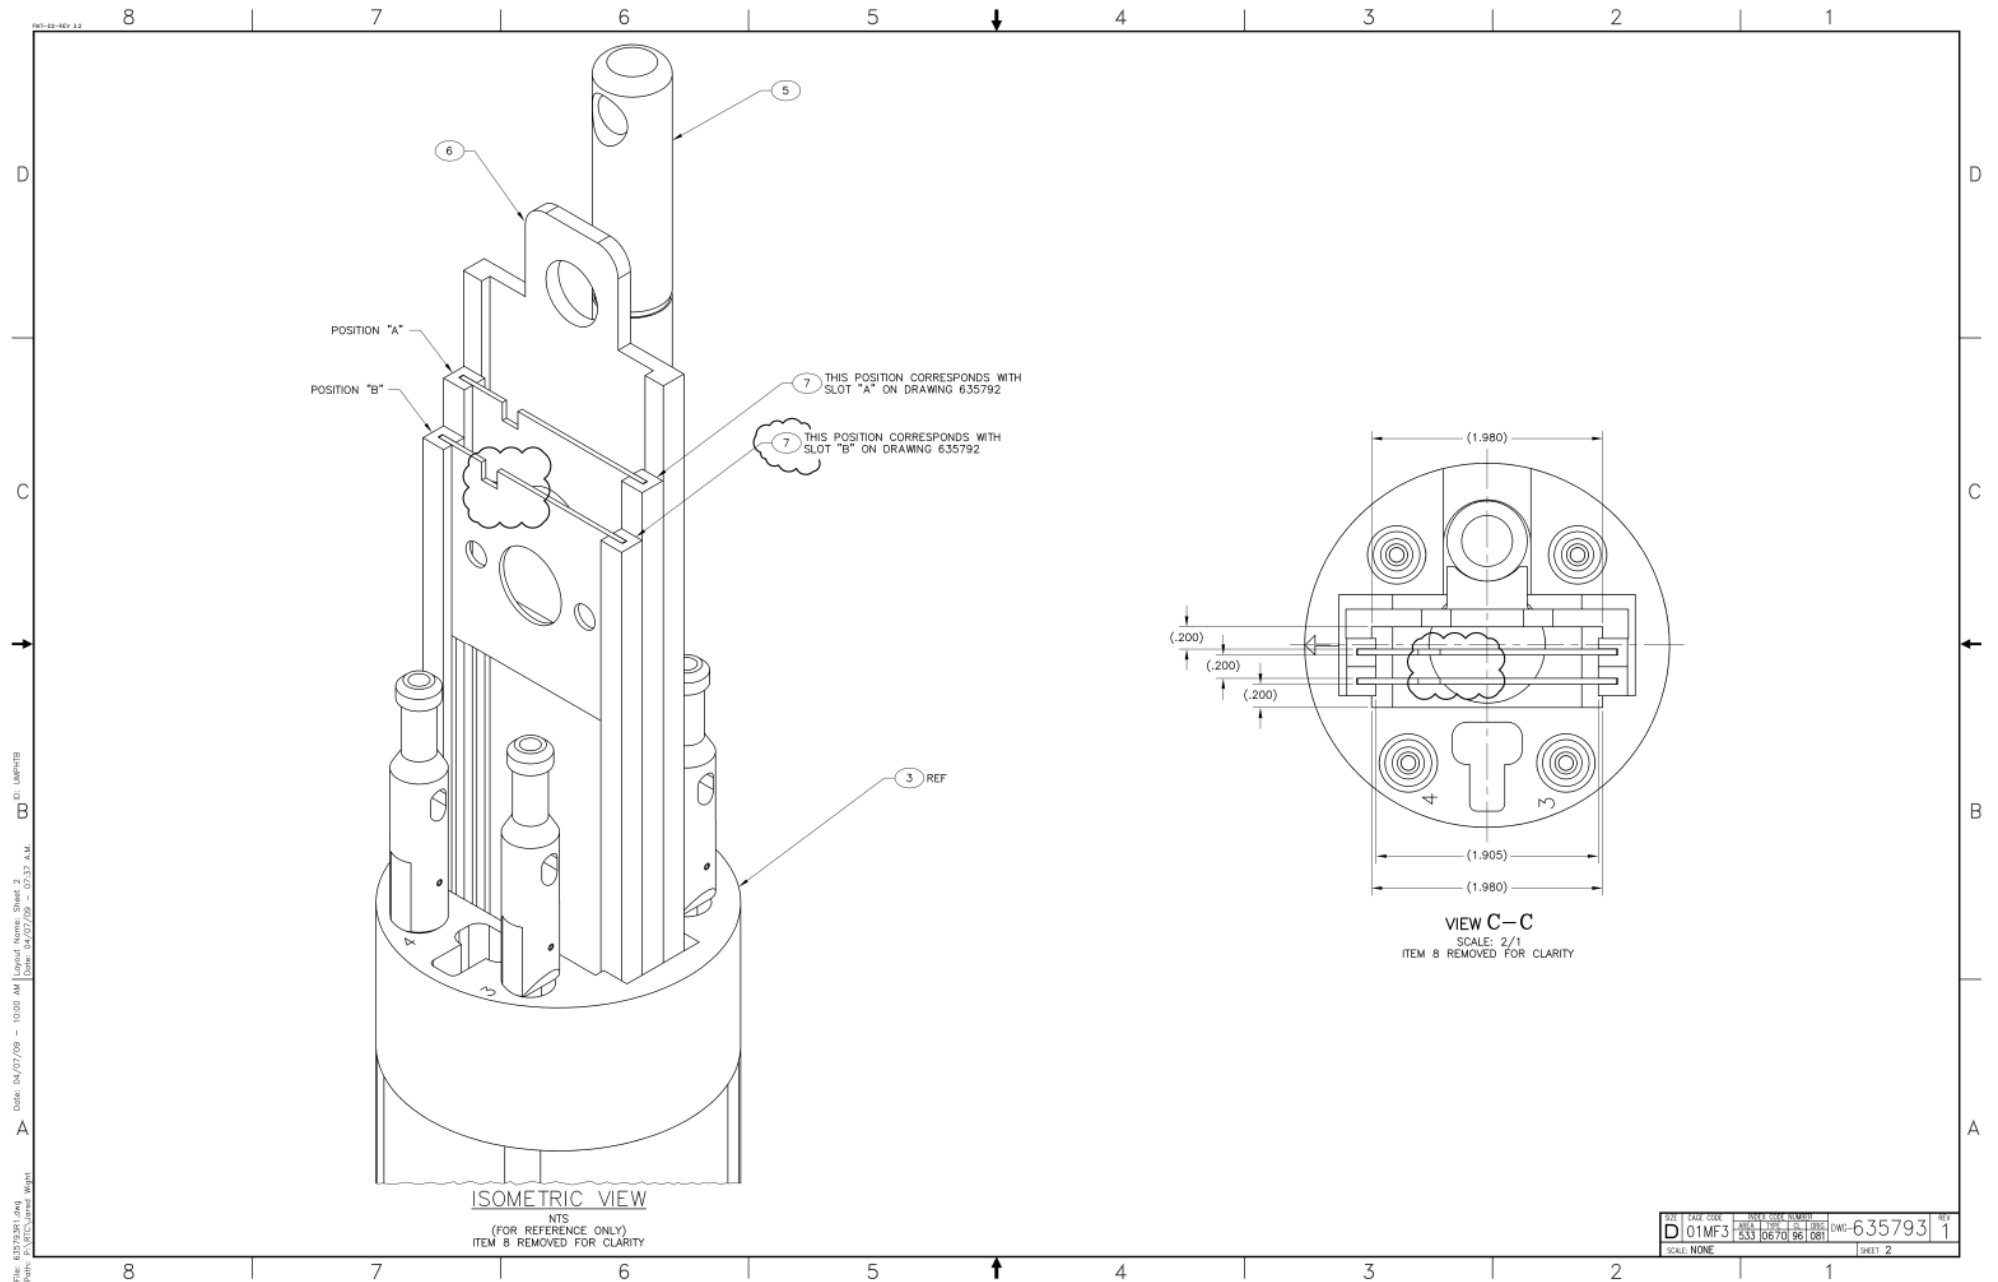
DWG 635793 ATR Full Size Plate in Center Flux Trap Position (AFIP) Test Train Assembly.
